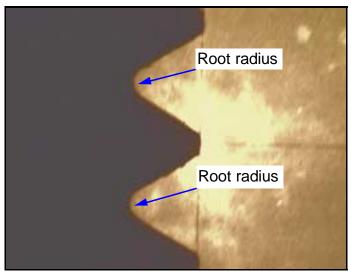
Typical thread form observed on the stabilizer fixtures. The dark area is the thread profile.
